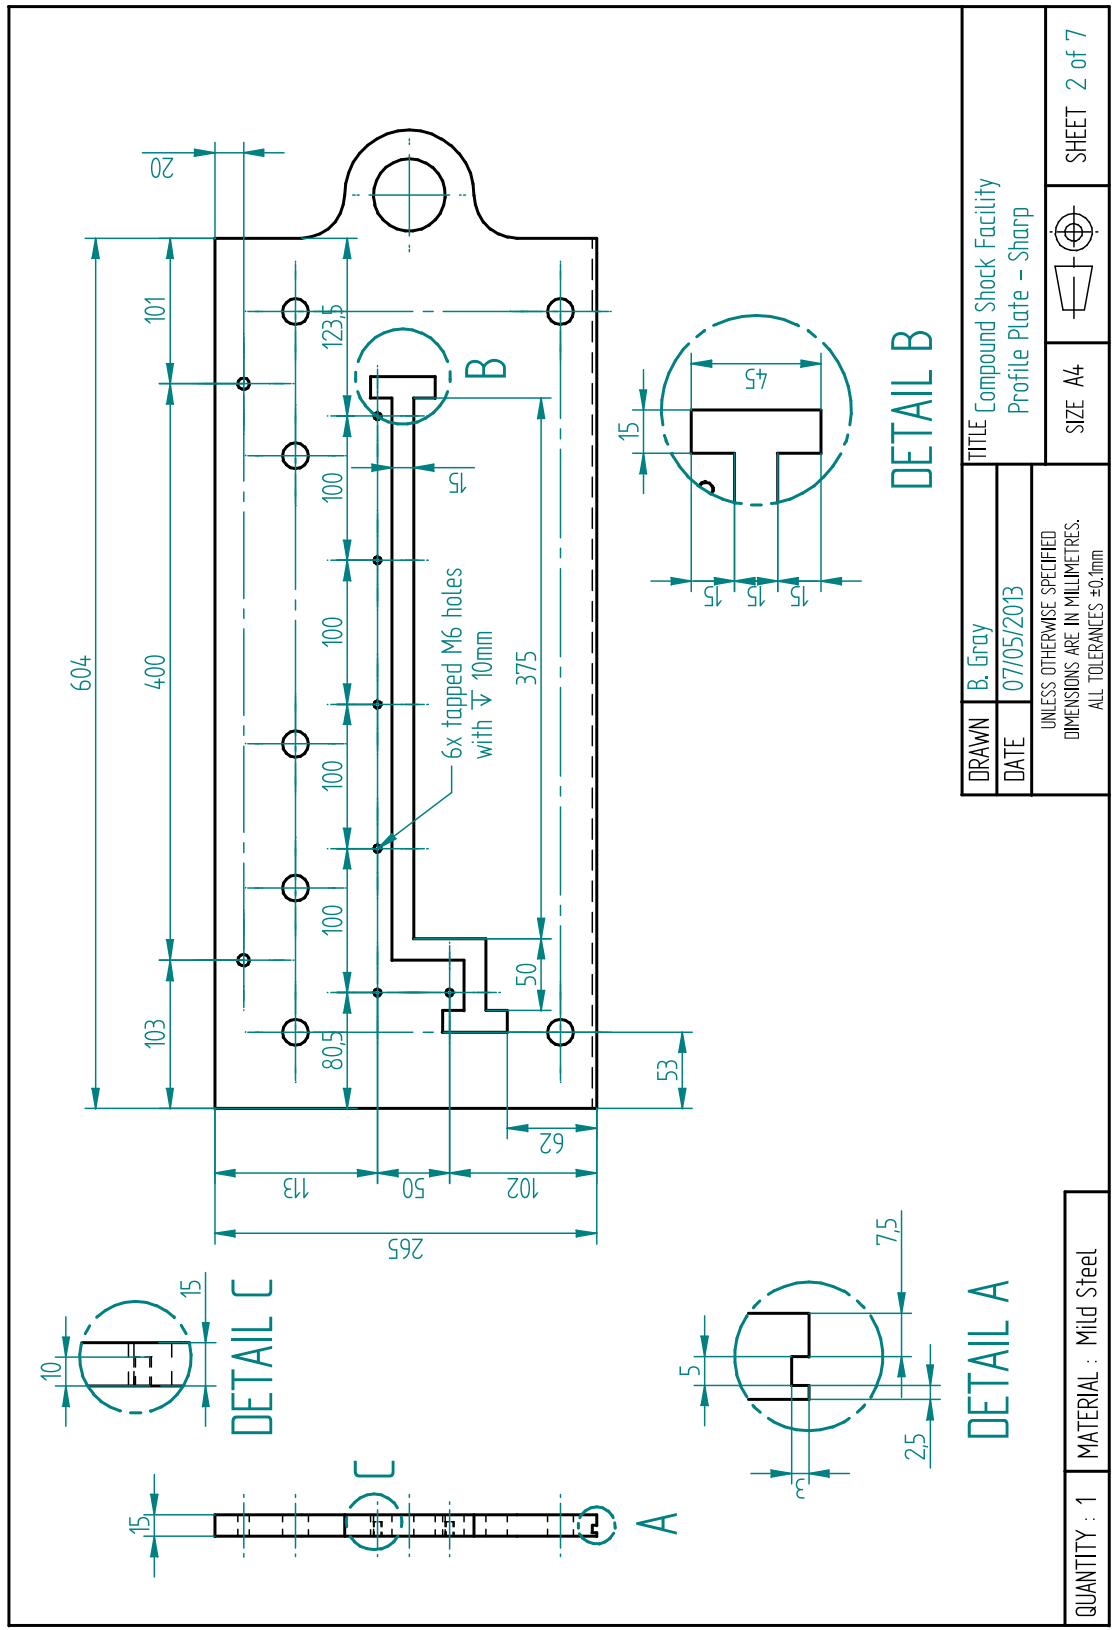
Engineering drawing of the sharp compound shock profile plate
